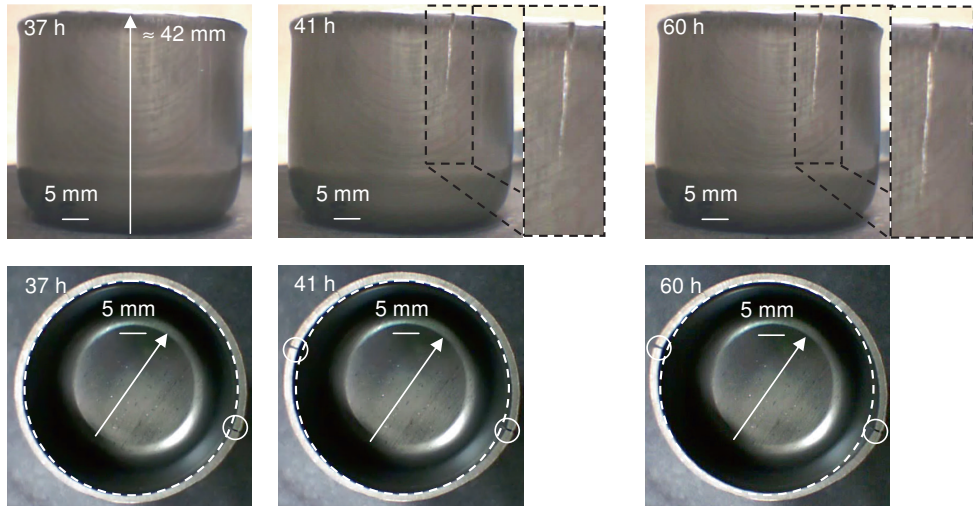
Side-(upper) and top-(lower) view images from the video observation of delayed fracture in air after 37, 41 and 60 hours of testing for material B. The labels on the lower left corner of the images denote the time after deep drawing. The white-dashed ellipsoids indicate the original cup diameter. The white arrows indicate the RD. The white full circles indicate the crack positions.
